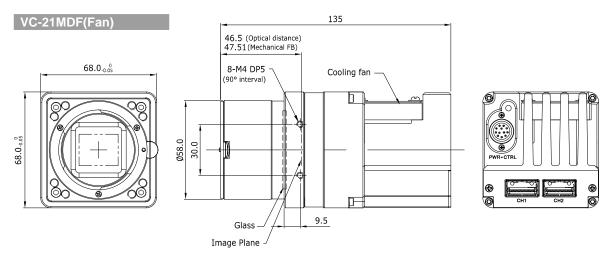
VC-21MDF-M/C460I Mechanical Dimension
